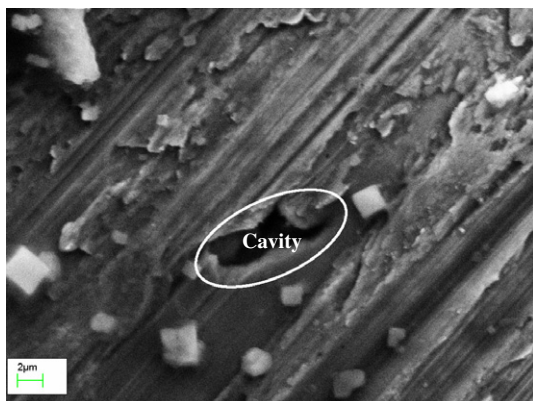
SEM analysis of the inner surface analyses for the inner surface of the seamless cold drawn tube of 1.1 mm diameter that shows one cavity.
